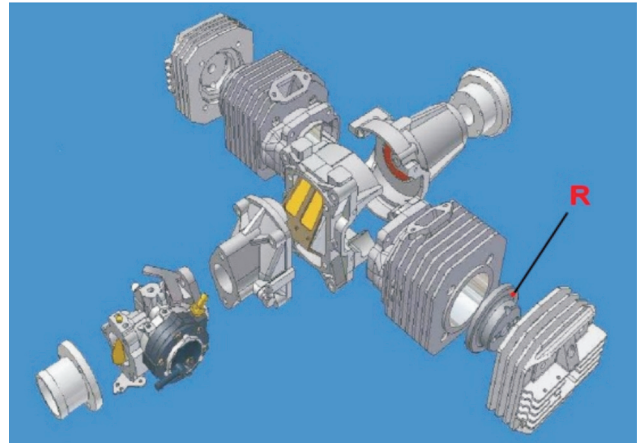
SCS 3W240 HFE Assembly; R – combustion chamber ring insert [8]
